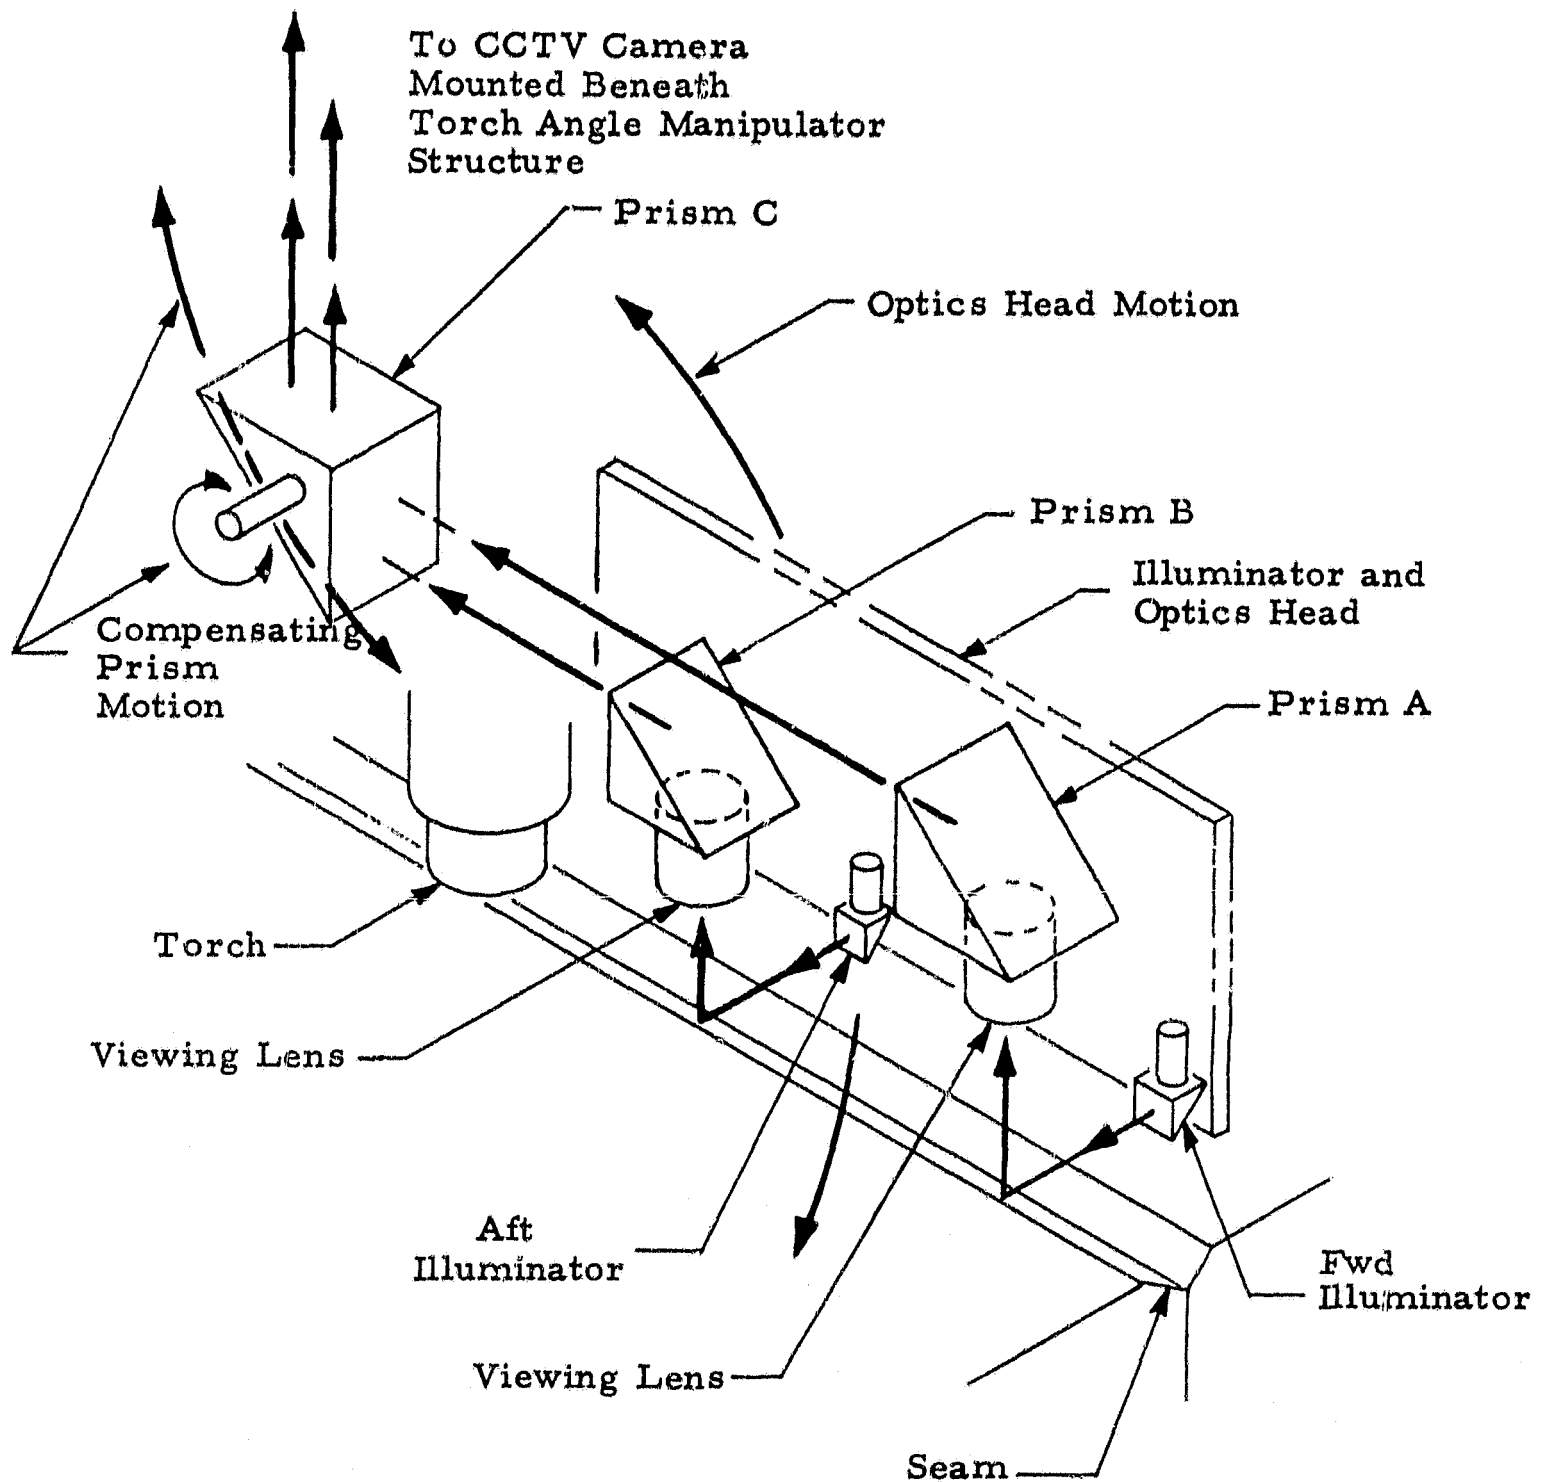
Seam Viewing Optics - Prism Configuration
